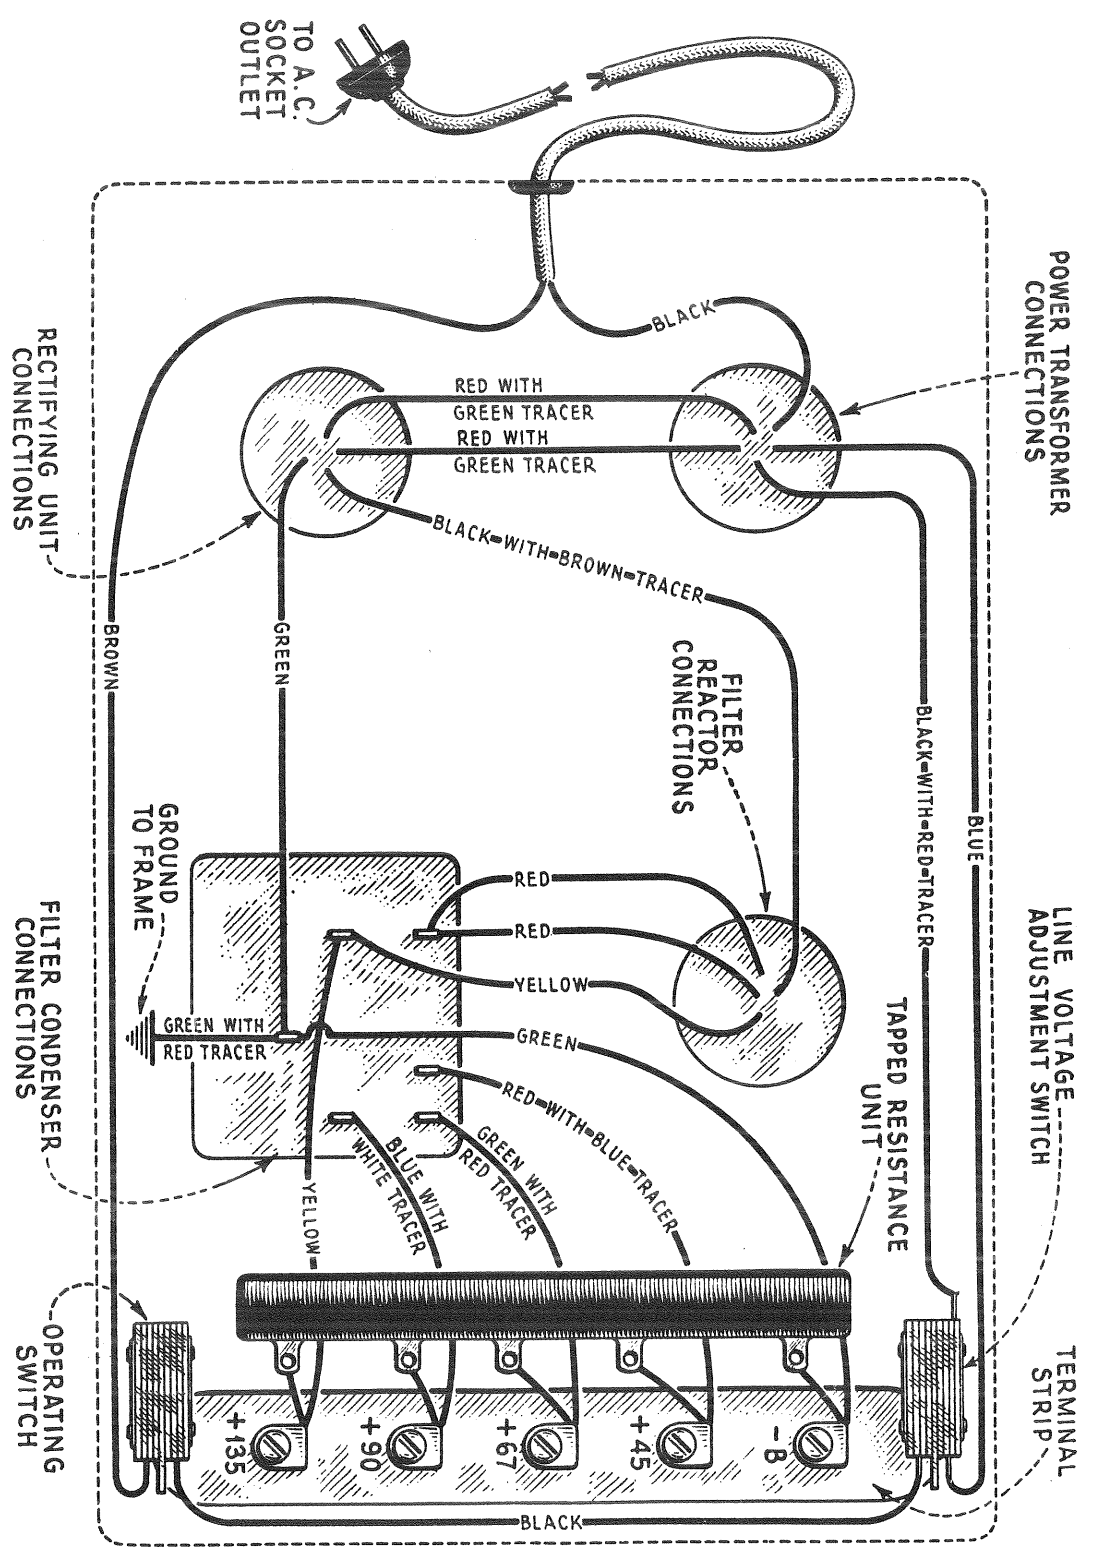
Sub-classis view of the RCA B-Eliminator showing color scheme of wiring and connections
